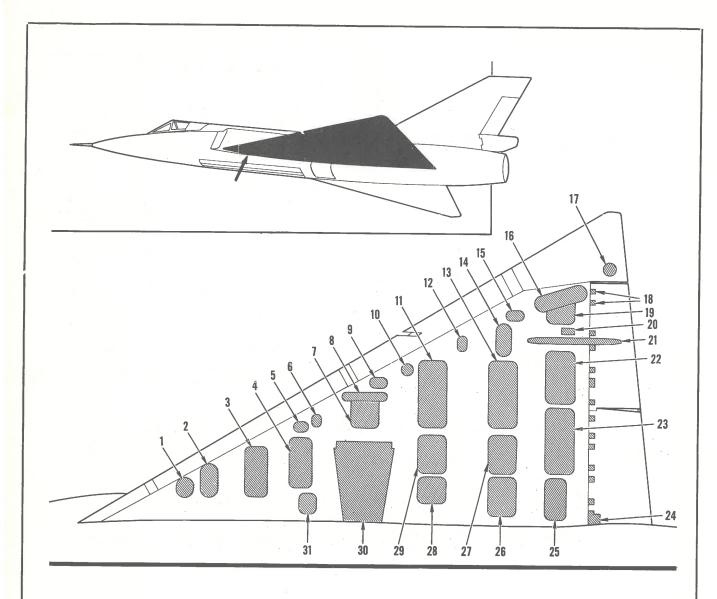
Access and Inspection Provisions, F-106B Fuselage
